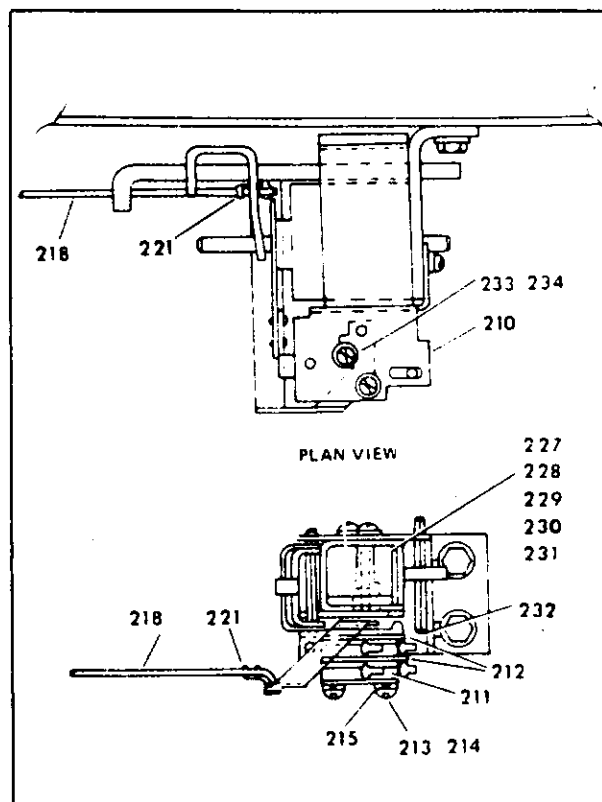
LA-600B, LA-800A and LA-1600B Alarm Switch Group, Bell Alarm
